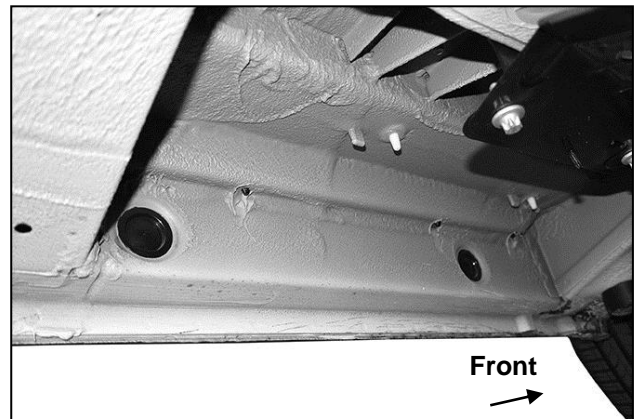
Attach Support Brackets to pinch weld (front and center Brackets pictured)
